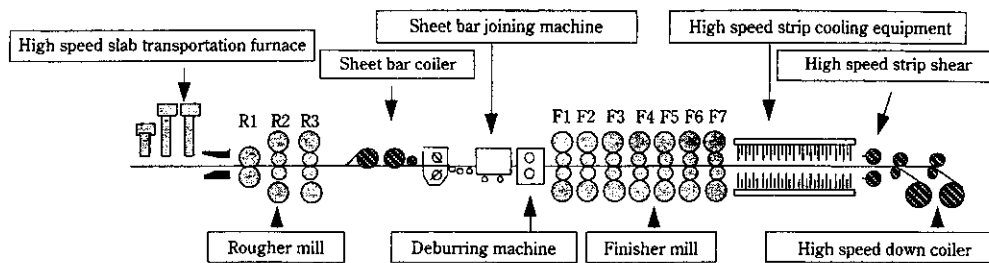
Layout of new endless hot strip mill at Chiba Works of Kawasaki Steel
